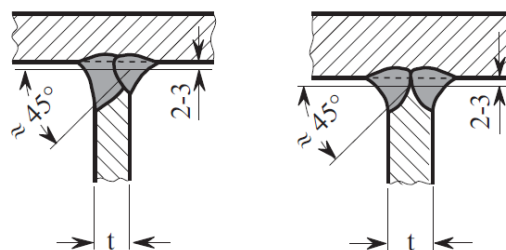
Single- and double-bevel welds with full root penetration
